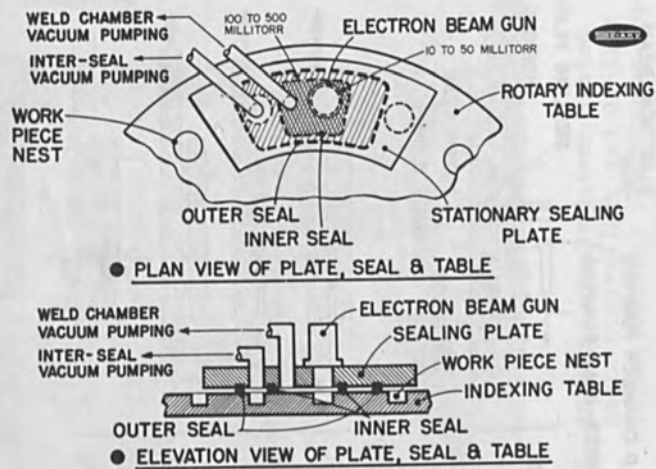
Schematic View of Mechanical Arrangement of Seal Plate, Sliding Seal, & Rotary Table.
